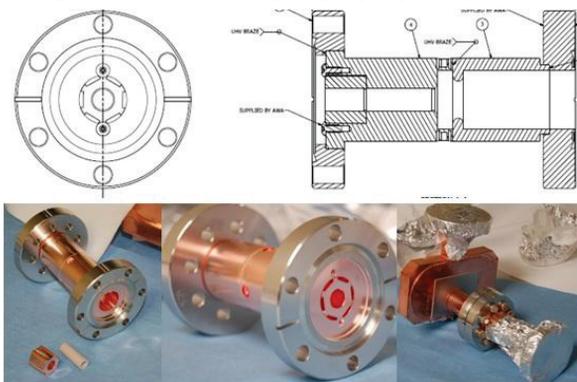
Top: mechanical drawing of the developed SW DLA structure; Bottom: finished structure.
